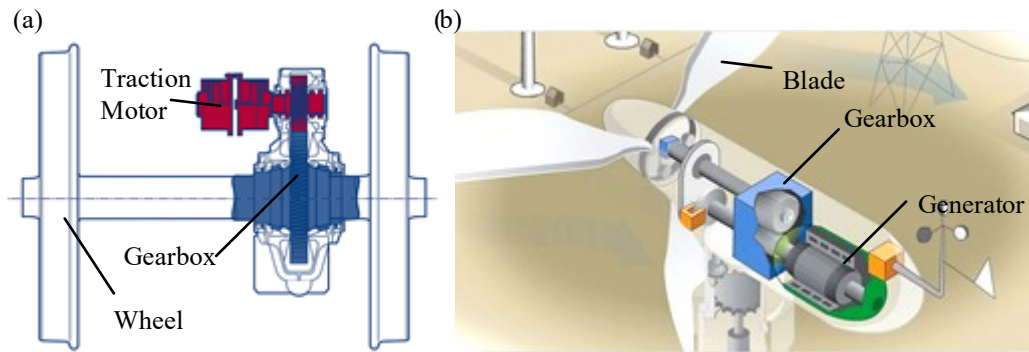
Gearboxes used in (a) railway vehicle [1] and (b) wind turbine [2].
